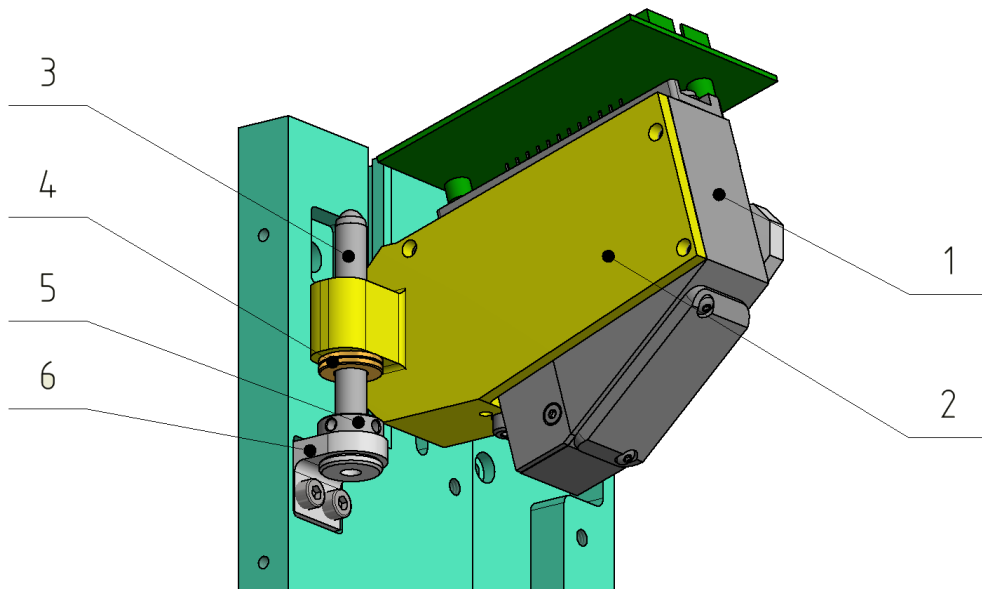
Mount for vertical adjustment of the spectrometer. 1 - spectrometer, 2 - spectrometer mount, 3 - M6x0.25 fine adjustment screw, 4 - threaded bushing, 5 - lock nut, 6 - screw housing.
